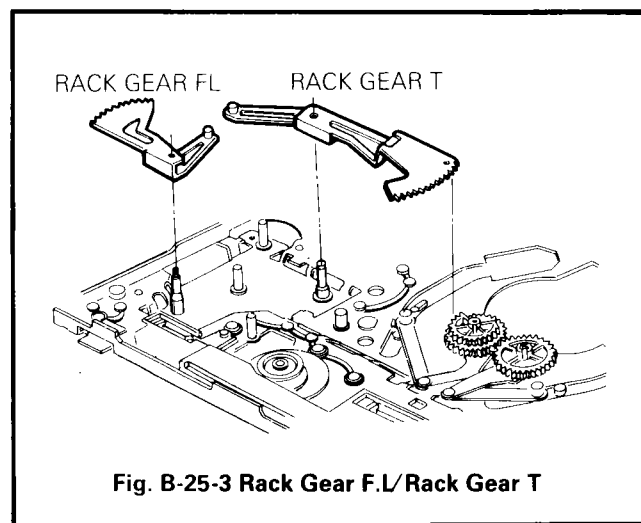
Rack Gear F.L/Rack Gear T
